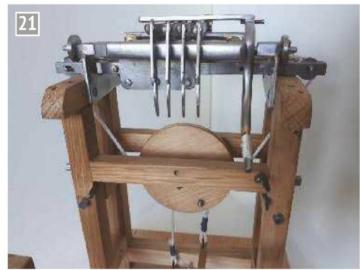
shows the locker bar assembled with jacks returned. Note the whipping used for a hand grip.
